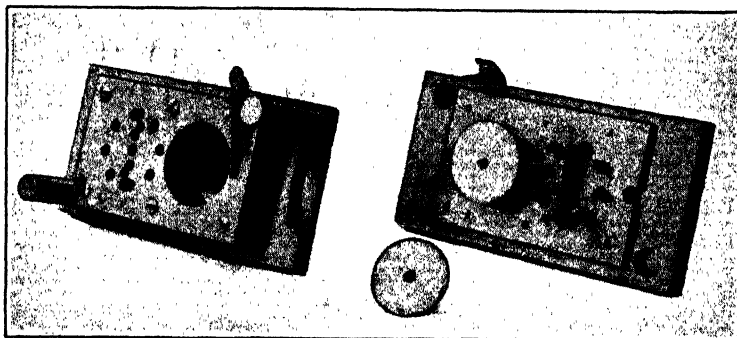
Blanking and piercing dies for coin wheel disk Fig. 37.
